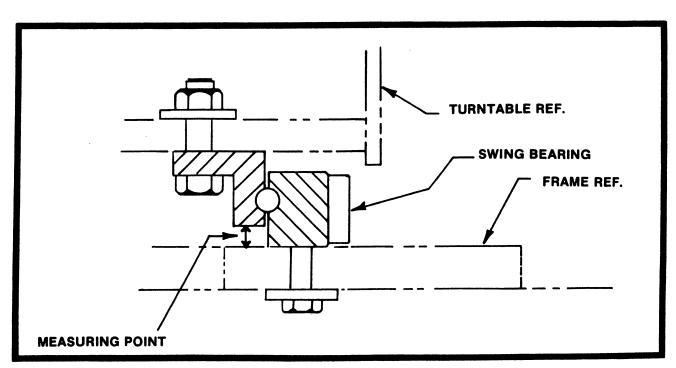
Swing Bearing Tolerance Measuring Point.
